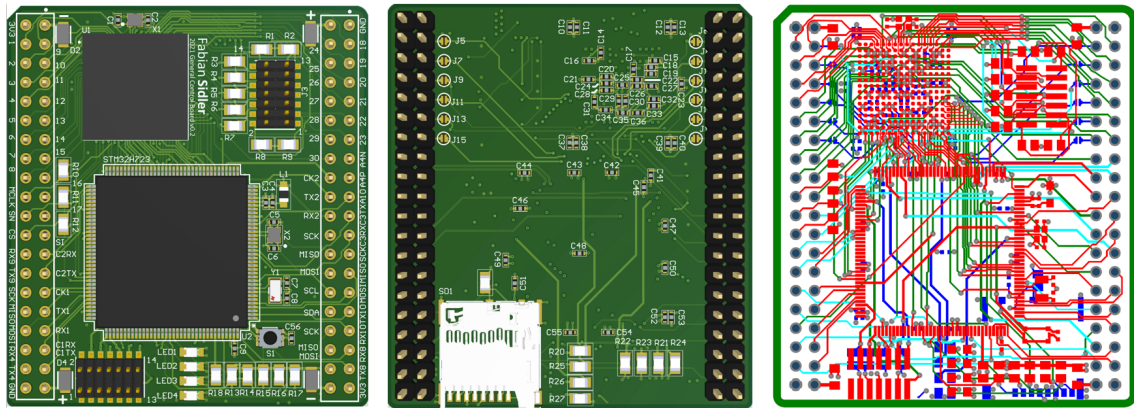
Top View, Bottom View and Traces of the GPPCB
